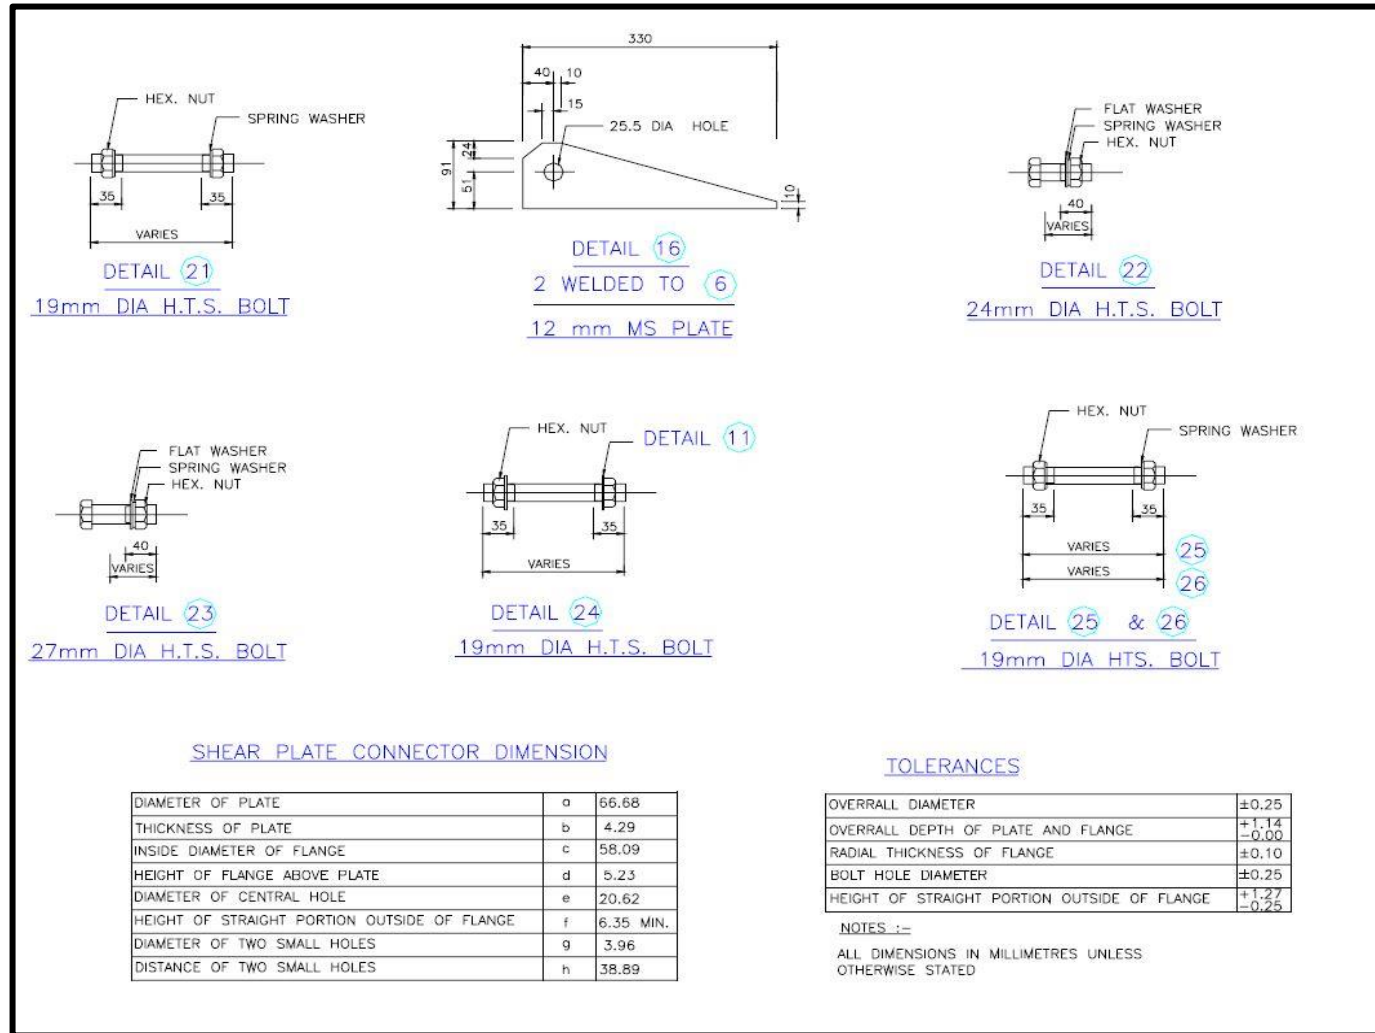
Detail Drawing of 275kV Composite Crossarm (H.T.S Bolt).
